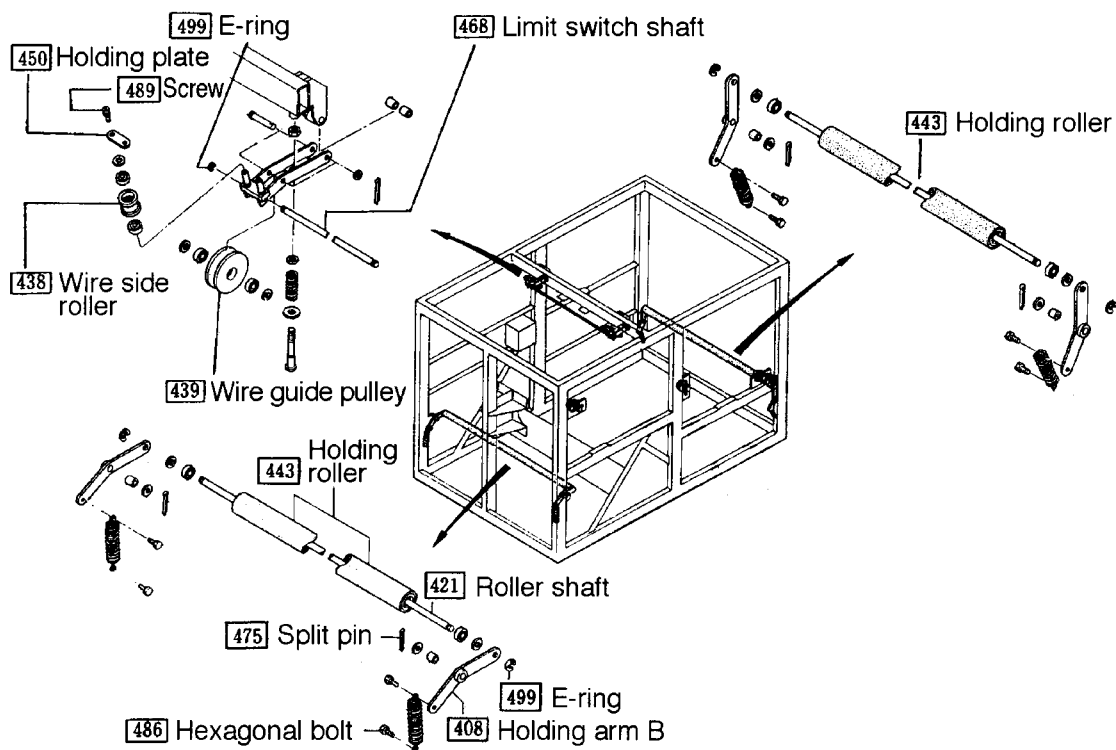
How to replace the wire side roller, wire guide pulley and holding roller
